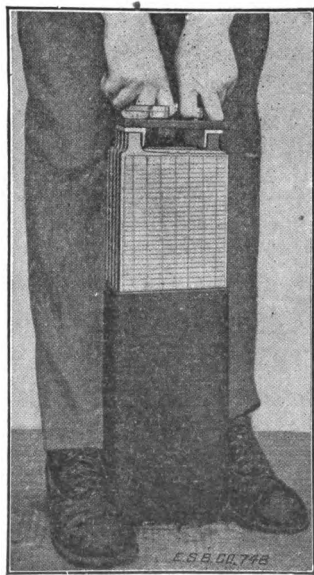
Plate Assembly Ready for Hard-Rubber Jar
